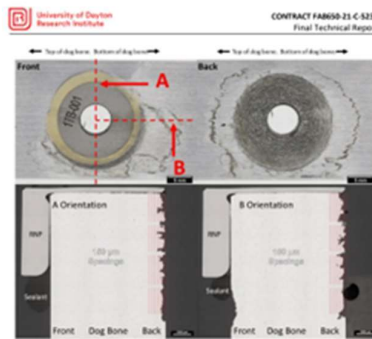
Results of severe corrosion tests on the bore of a fastener hole.
